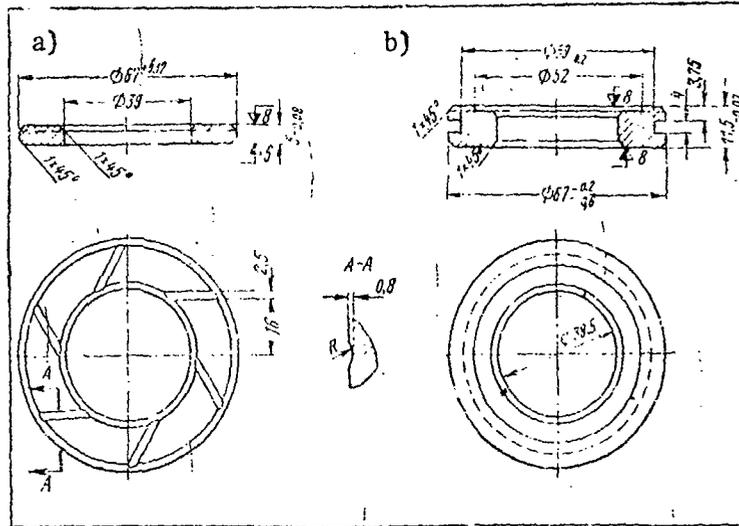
Parts of the Turning Arm Support Bearing: a, support washer, b, support ring.
